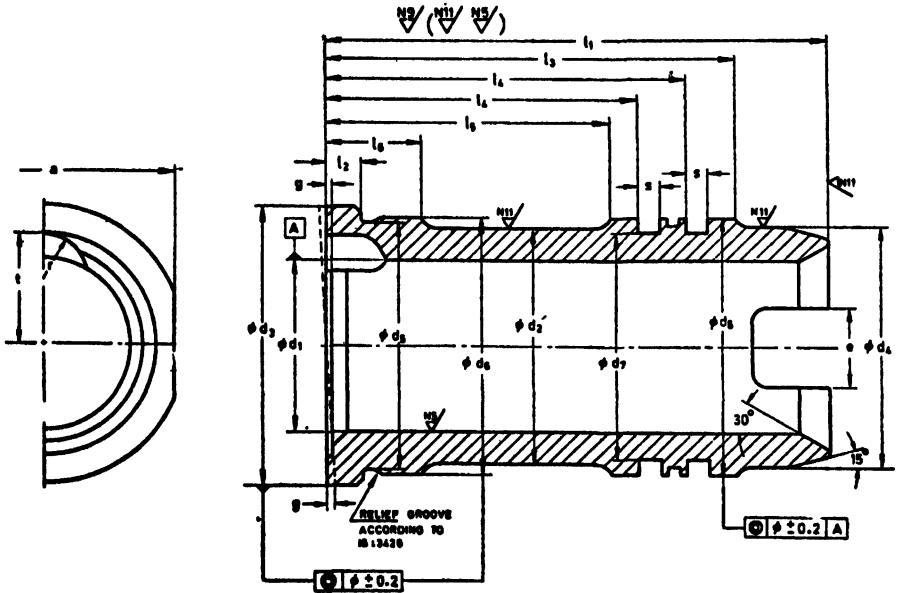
DIMENSIONS FOR WET CYLINDER LINERS
